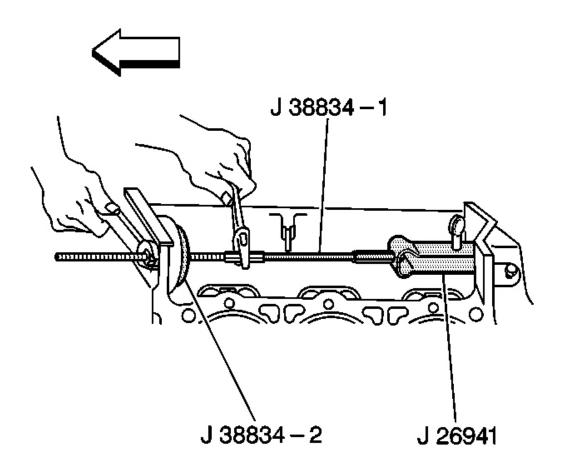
Removing Balance Shaft Rear Bearing Courtesy of GENERAL MOTORS CORP.
